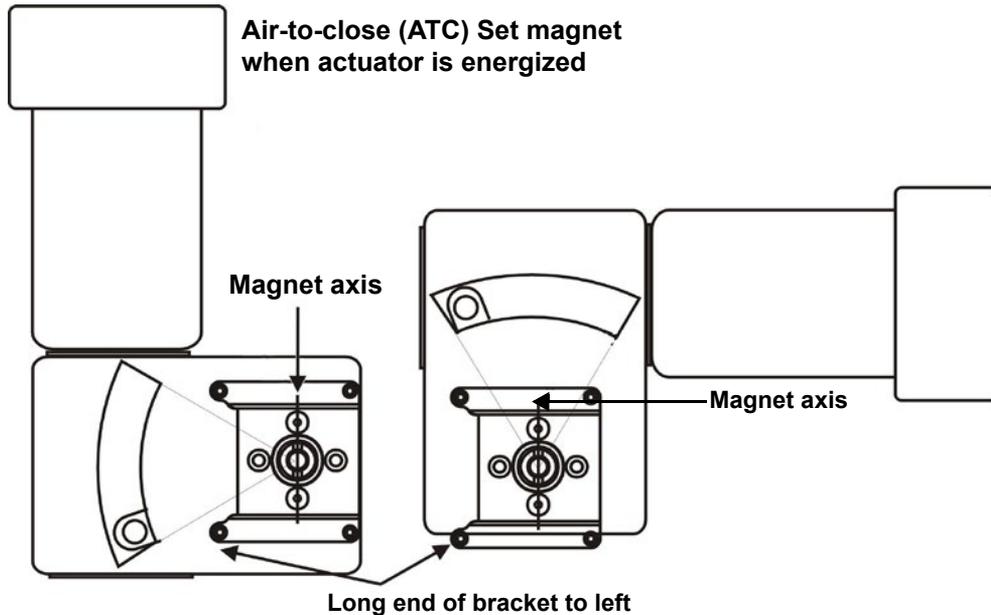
Mounting Bracket on Air-to-Close Actuator
